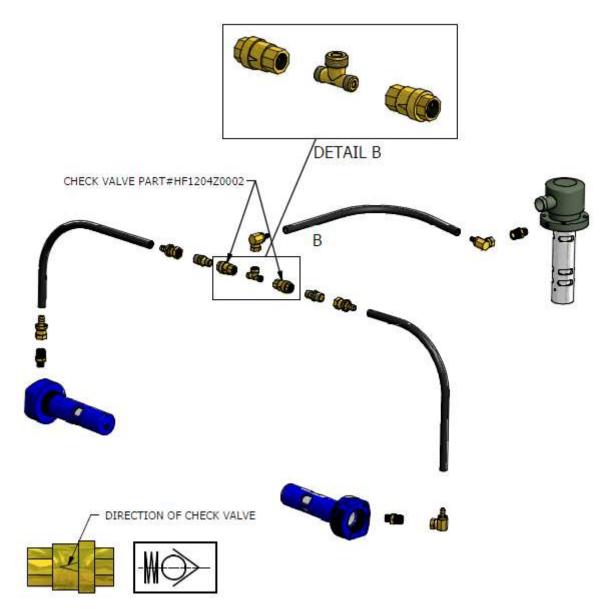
Multiple Filling Valves with Single Vertical Float and Check Valve
